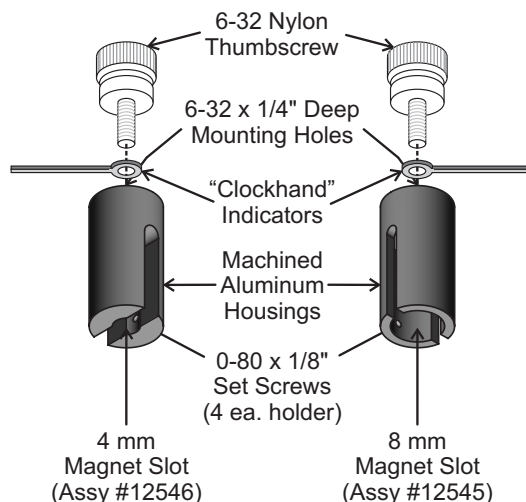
4 mm magnet holder (part #12546; left) and 8 mm magnet holder (part #12545; right). 0.44" dia. x 0.88" tall (11 mm x 22 mm) outside dimensions; actual size.
